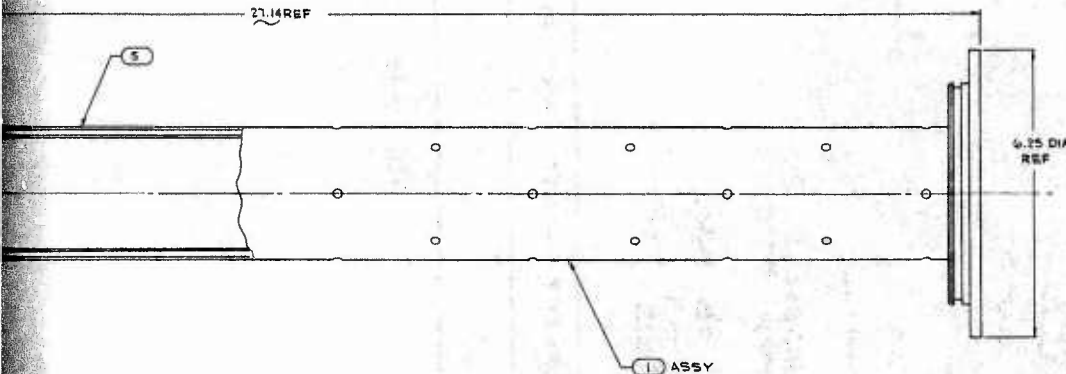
Hydrostatic Test Assembly, Collector Pipe.
